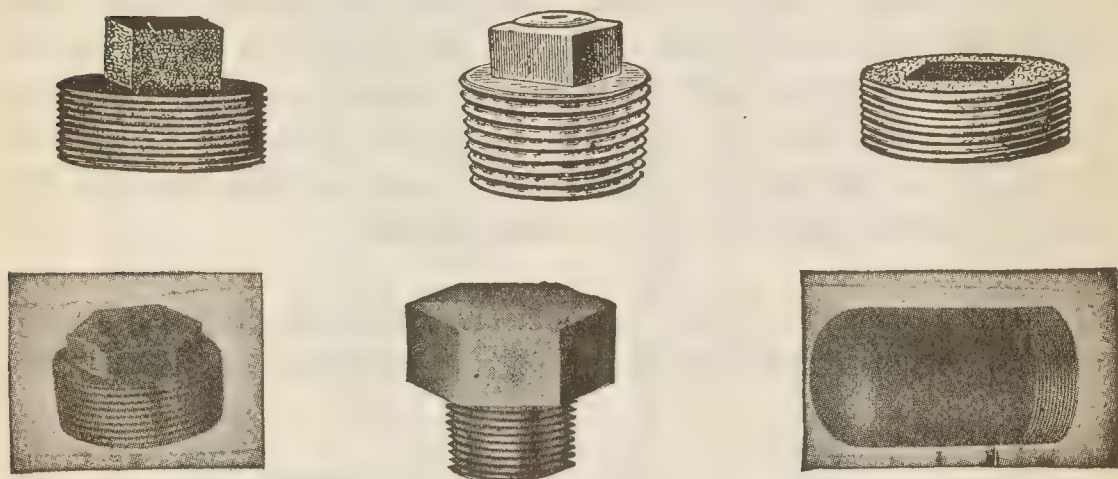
,899 to 7,904 show the patterns: hollow, solid, counter sunk, and diamond design.
